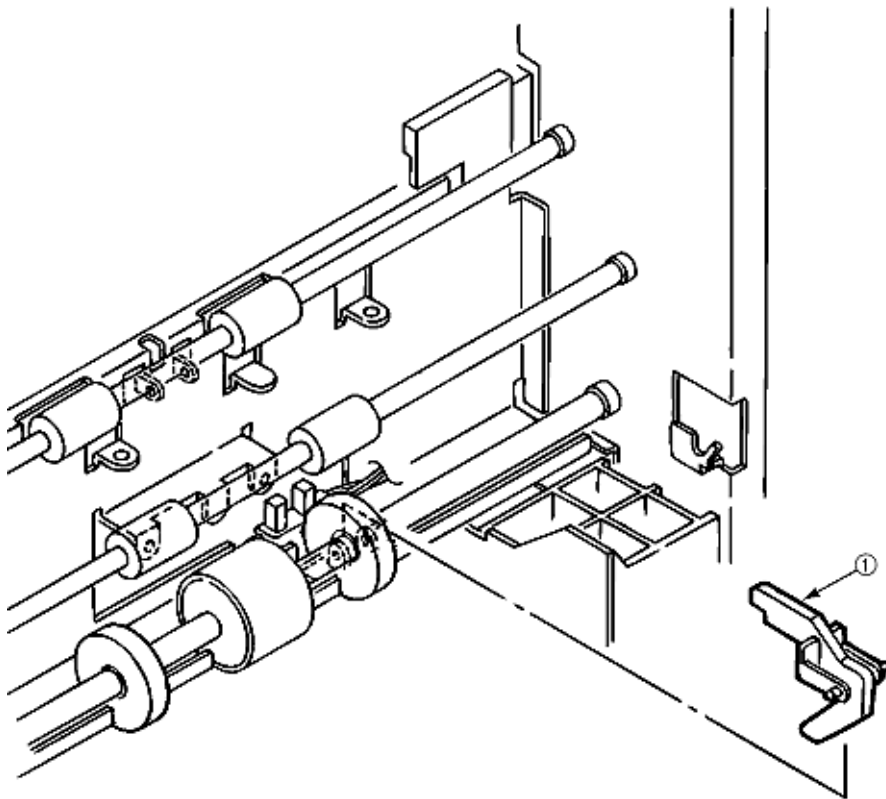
PXU PCB/PXM PCB, Lever Resist Sensor
